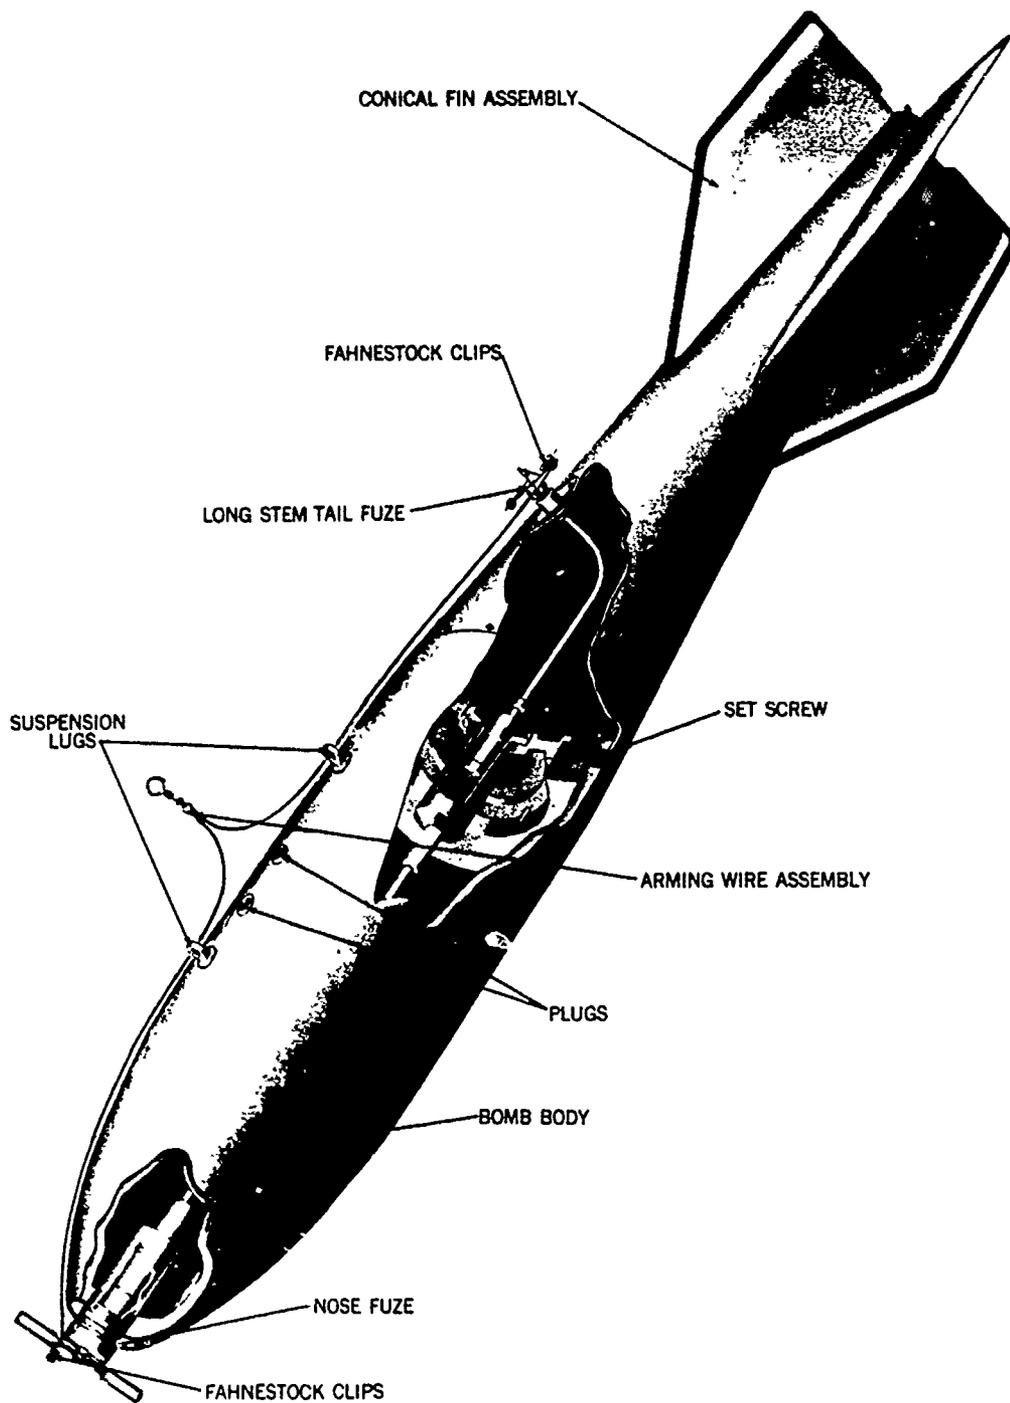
750-lb Demolition Bomb M117 (Mechanically Fuzed), Cutaway View.
